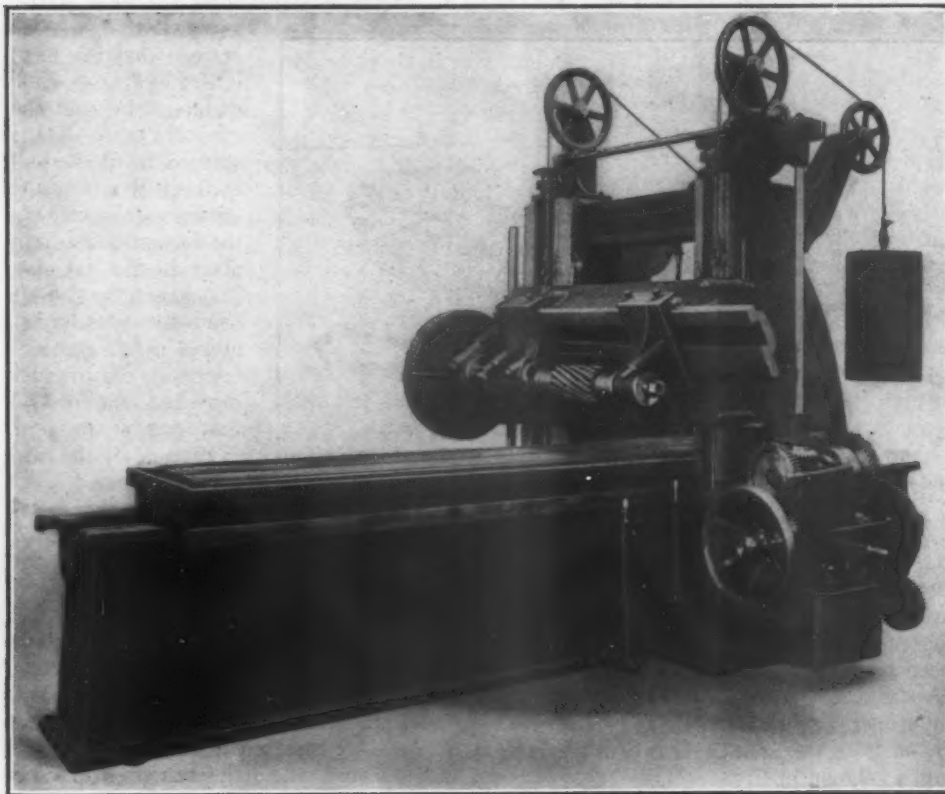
View of a Newton Horizontal Milling Machine, Built by the Newton Tool Works, Inc., Philadelphia, Pa., Equipped to Cut Spur Gears.
